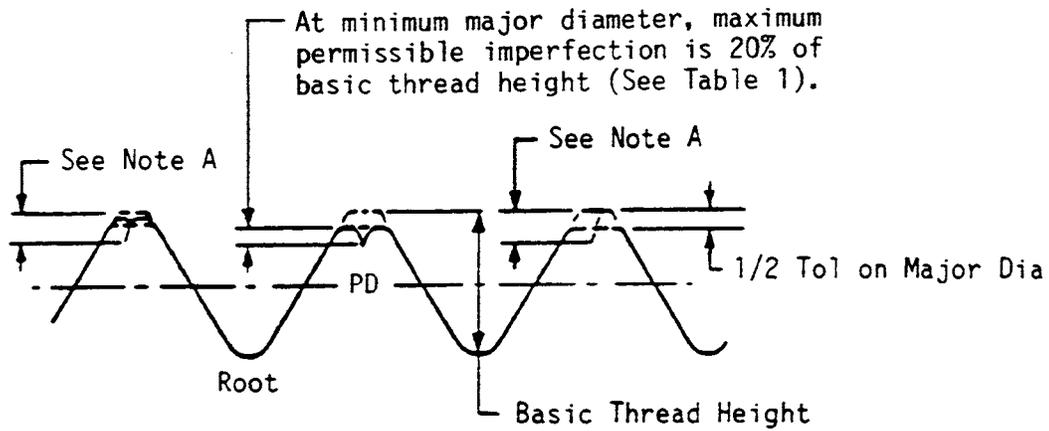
LAPS EXTENDING TOWARDS CREST, ROLLED THREAD
